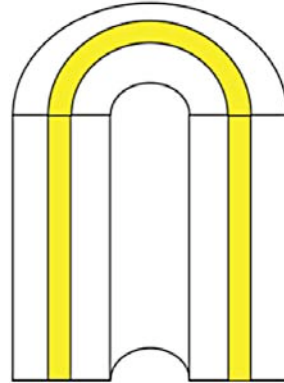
Test of a multi-material wall in which an Au tracer layer was buried in a Cu wall.
